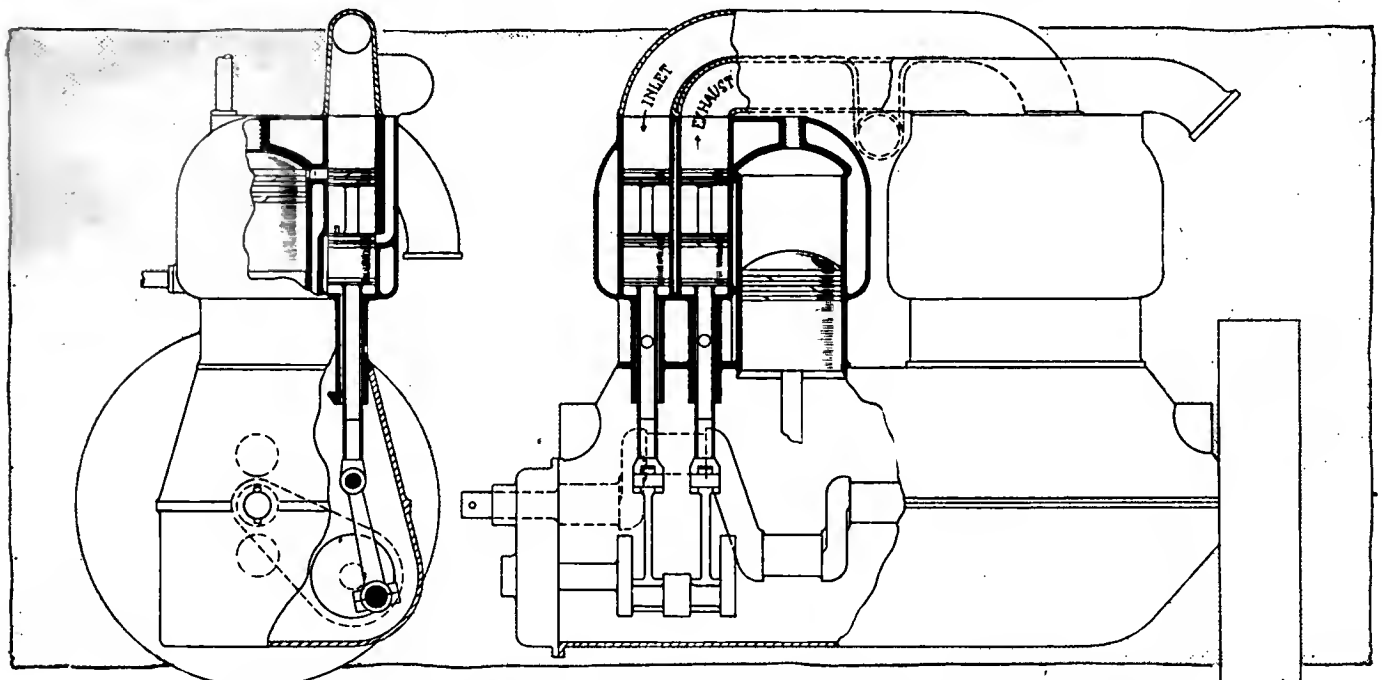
Sectional views of Laycock piston-valve motor in which provision is made for scavenging
